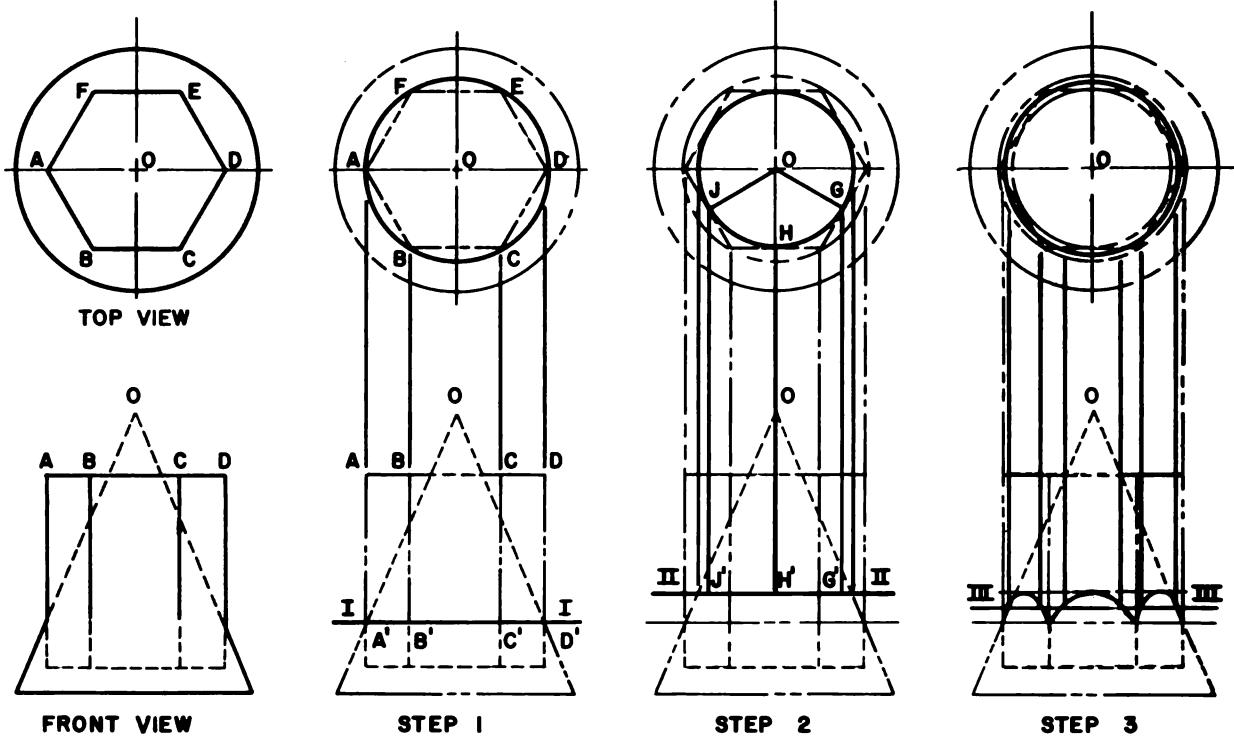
Intersection of a plane and a right cone (conic sections).
